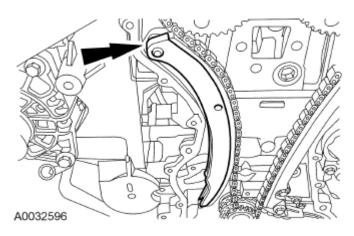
Locating Timing Chain Guide Courtesy of FORD MOTOR CO.
